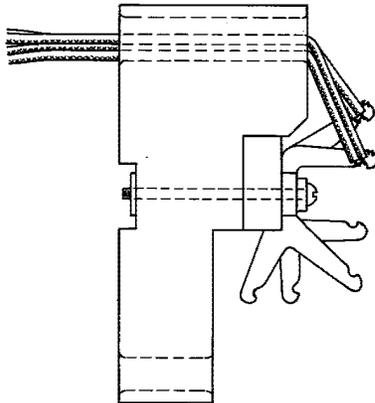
Permanently Bridged Cross Connections on No. 65 or Similar Type Terminal Strips
